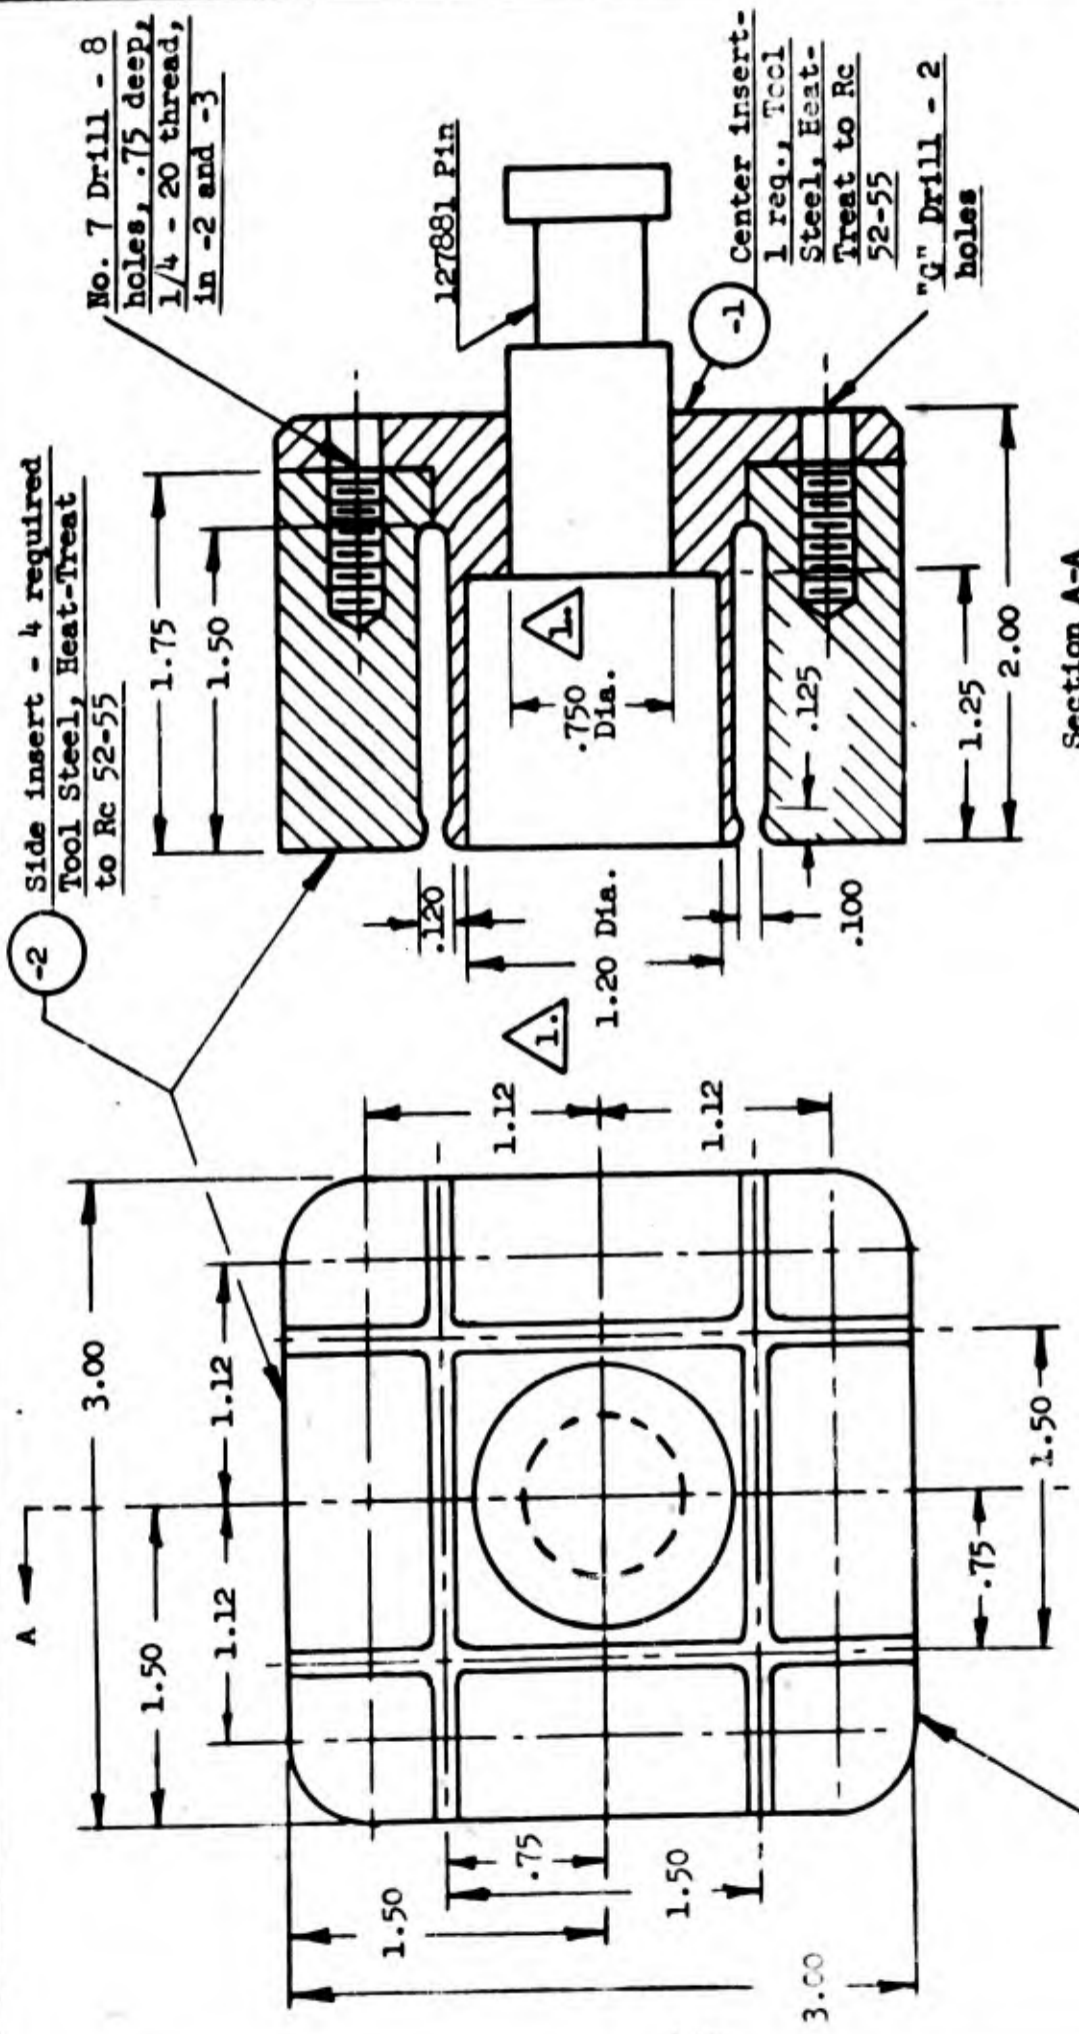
Flat punch with shoulder used to provide stiffening pad around edge of skin to prevent distortion during part extraction.
